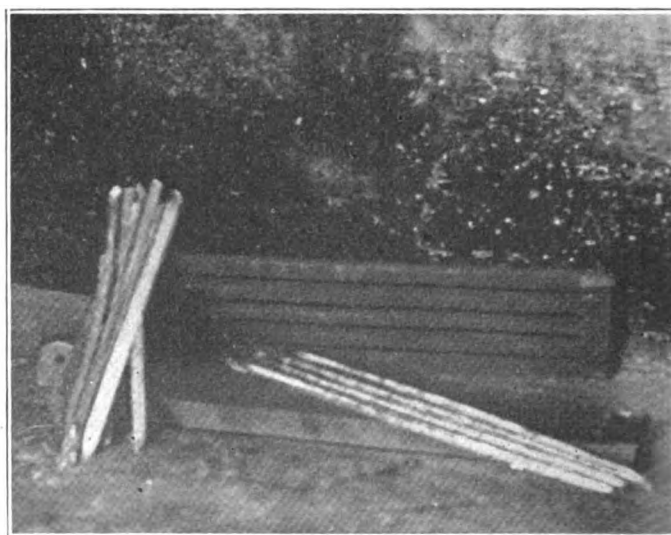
Lead Burning Strips and Mold They Are Cast In.
